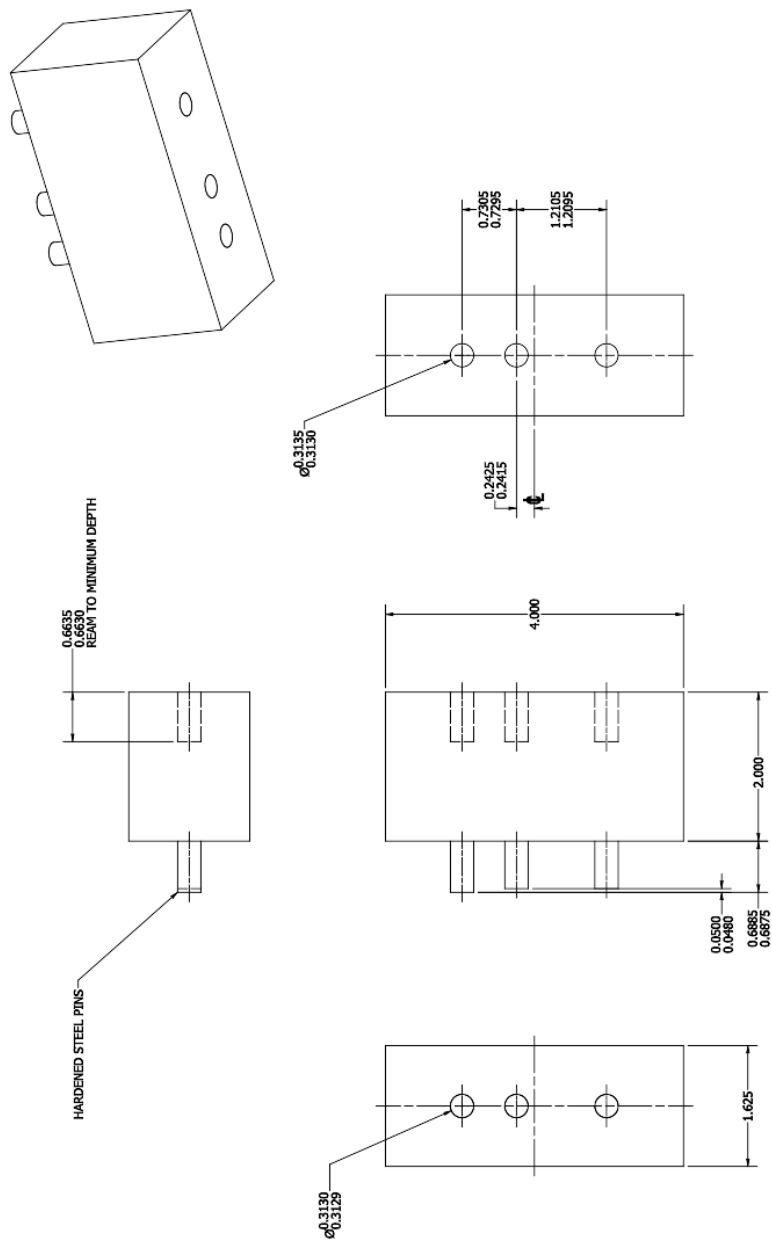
Pin and sleeve alignment test fixture - 30 ampere device (5T30)
